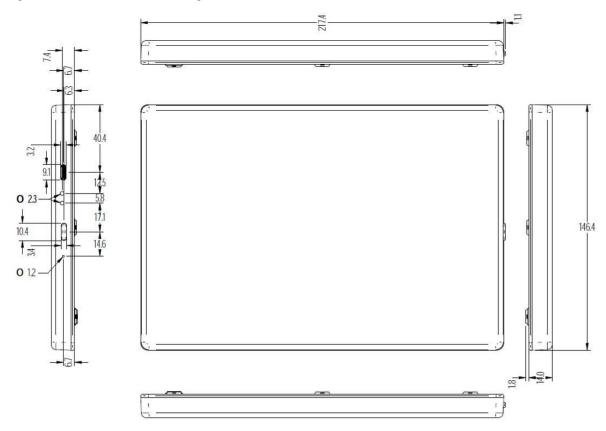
trID R1210I Technical Drawings – Front panel view
